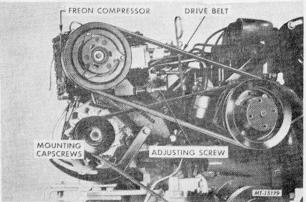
Removing Freon Compressor Drive Belt and Compressor
